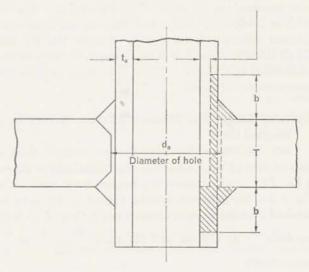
Compensation of Welded Tube Stubs
